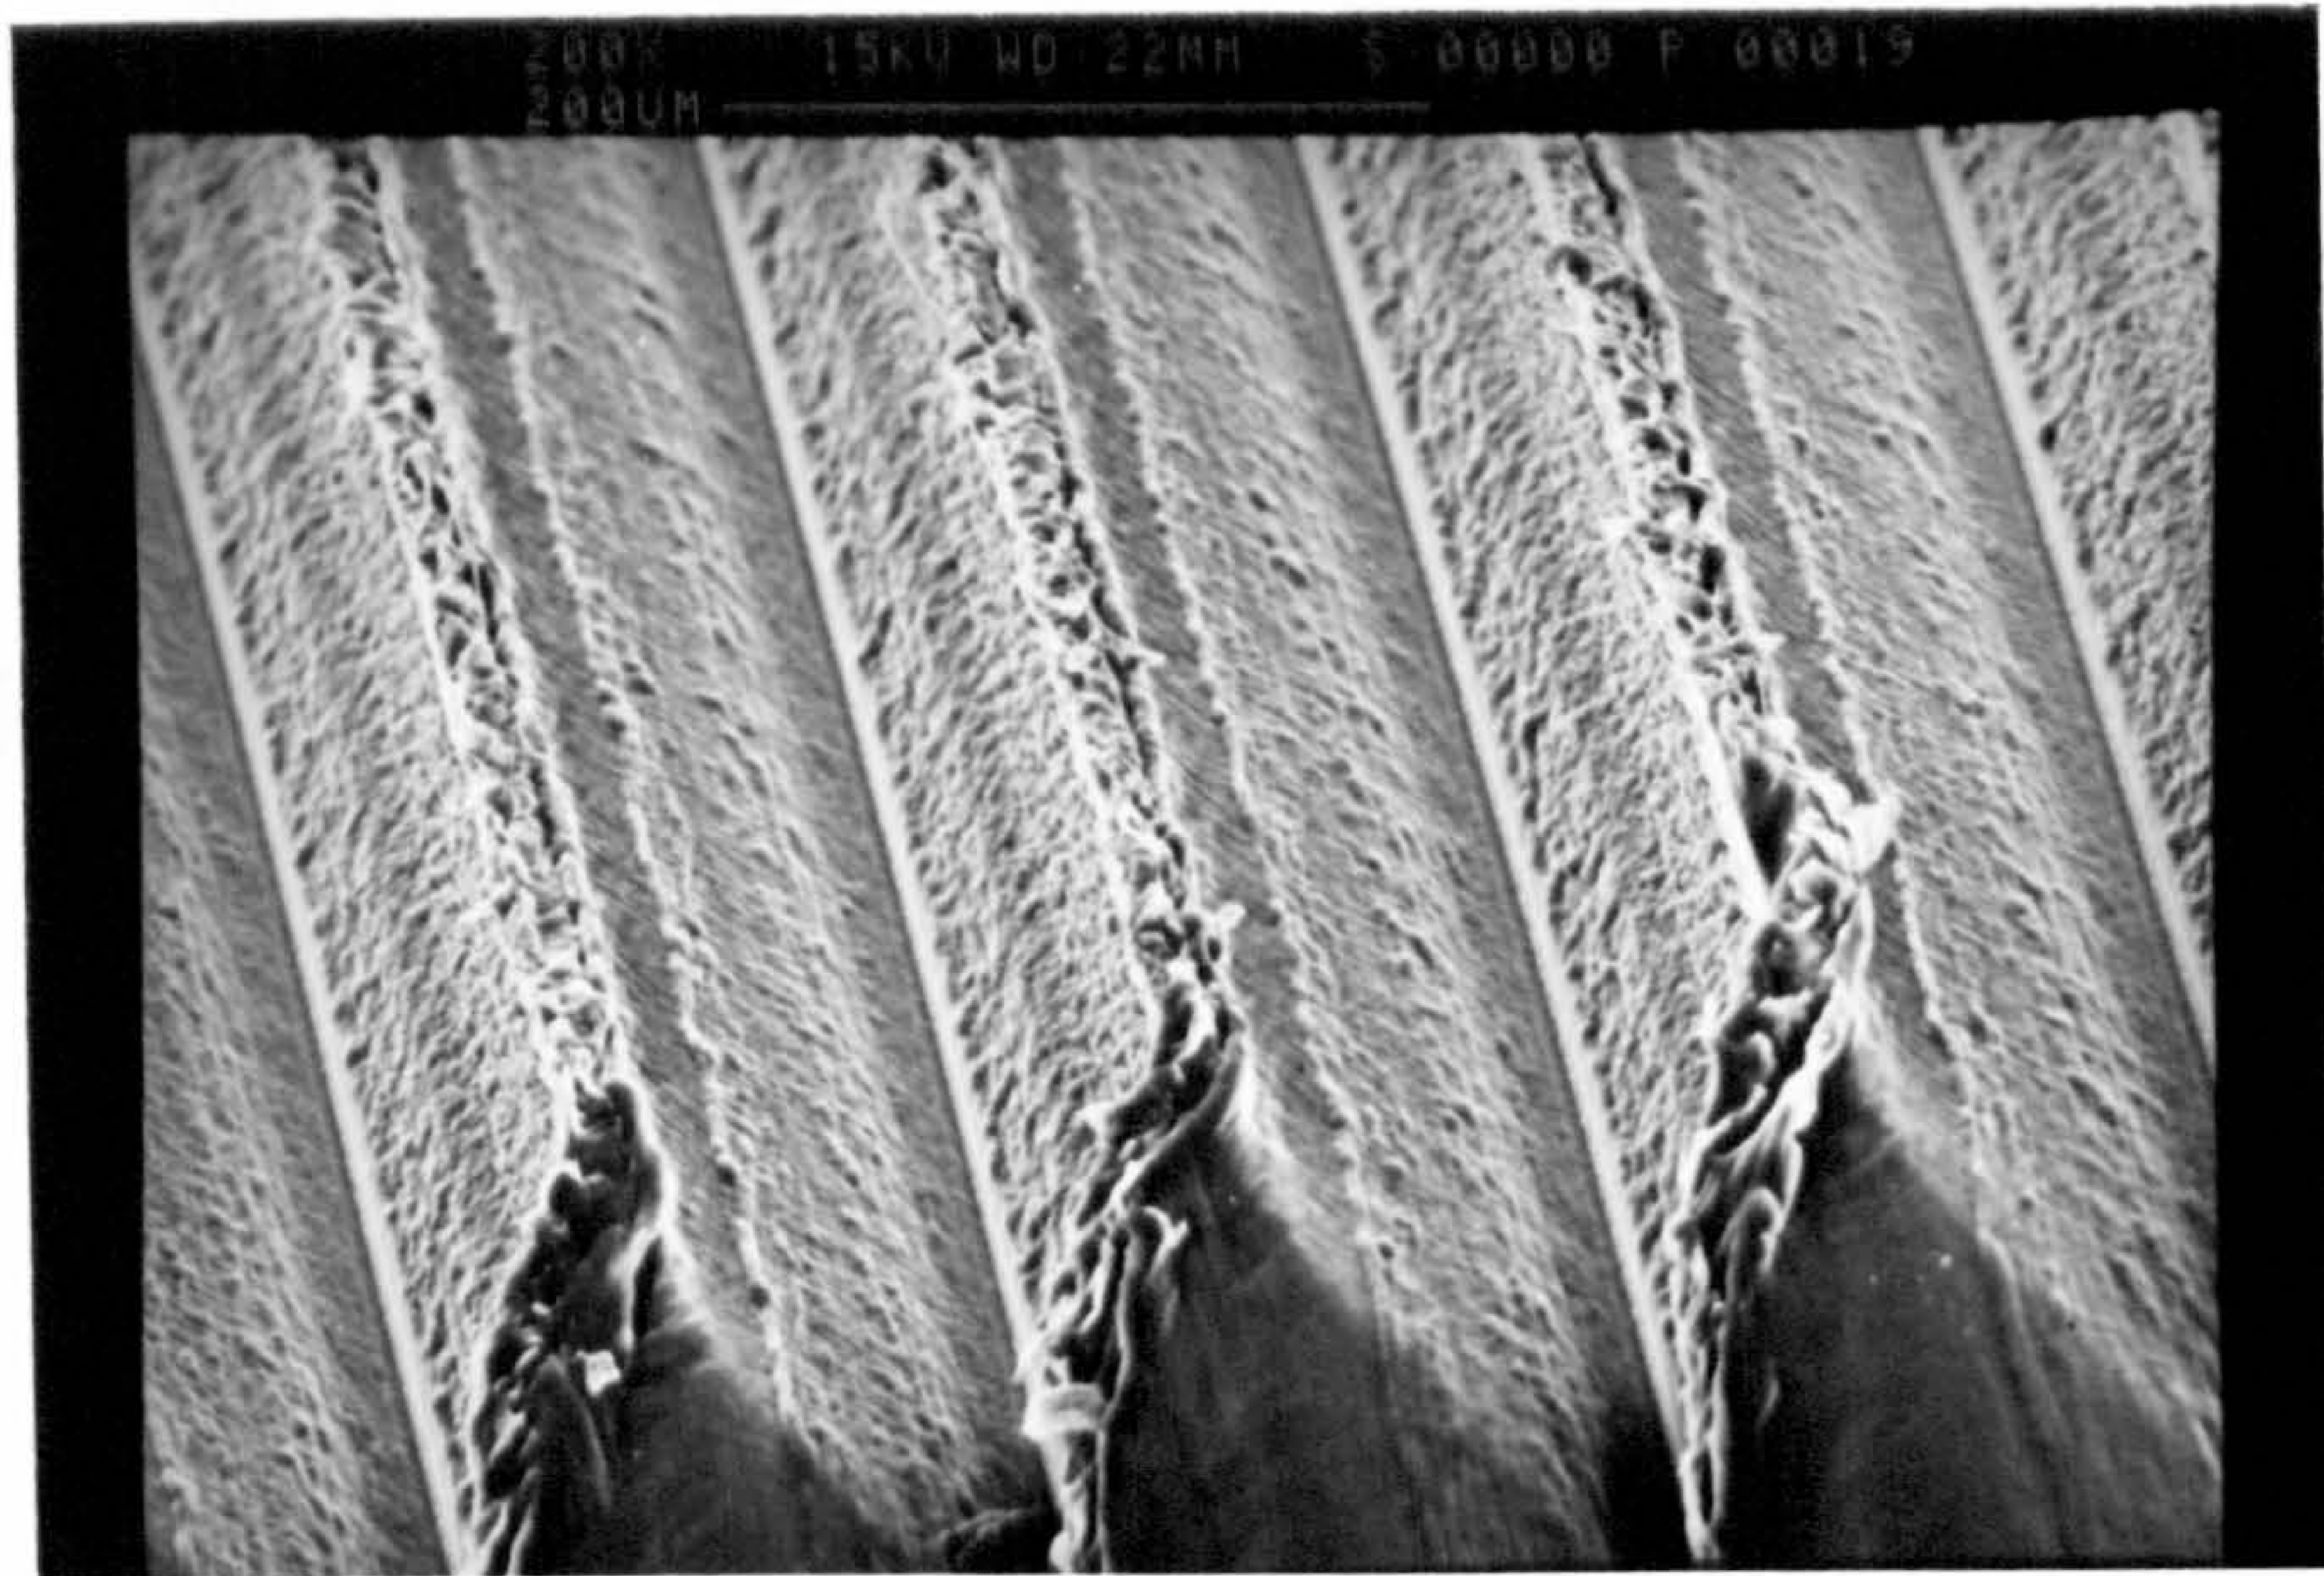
HDPE surface machined at  $-20^\circ$  rake angle. (Speed = 250 m/min, feed = 0.16 mm/rev)
